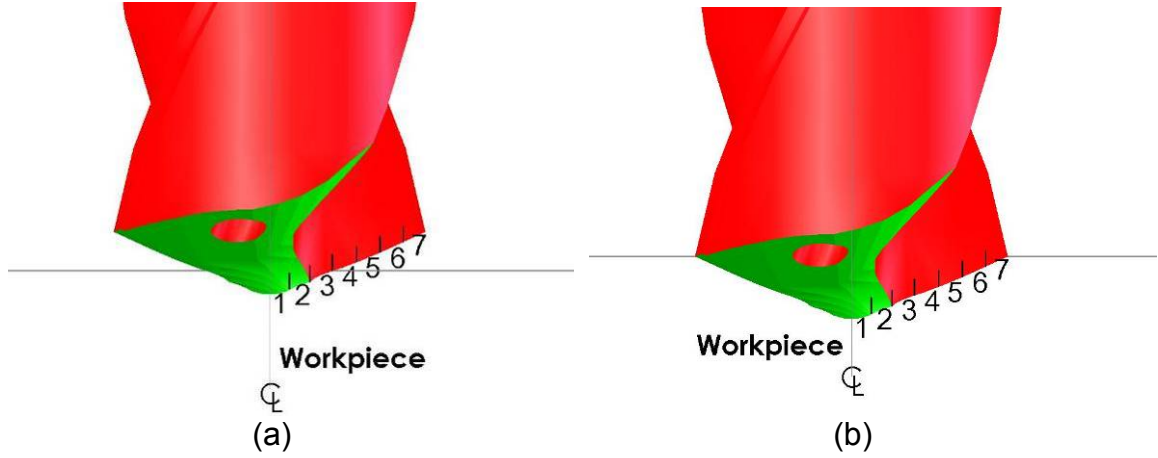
Illustration of two stages in drilling: (a) partial engagement of drill tip with the workpiece (ECT 1, 2, and 3 engaging the workpiece) and (b) full engagement of the tool tip and all seven ECTs with workpiece.
